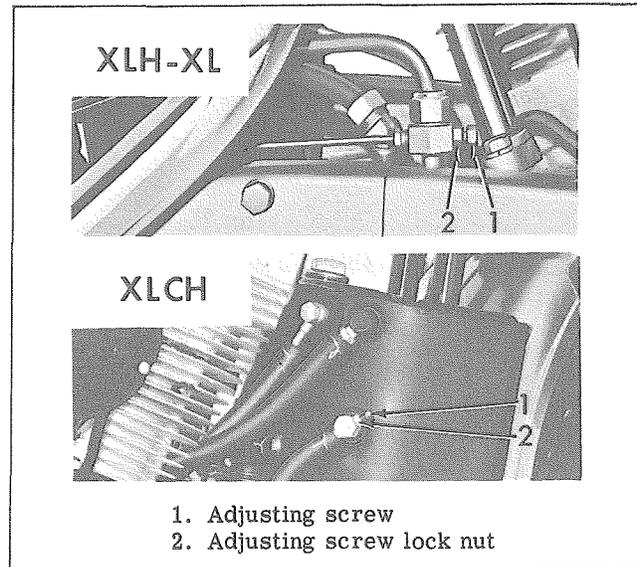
B-4. Rear Chain Oiler (1966 Models Shown)
